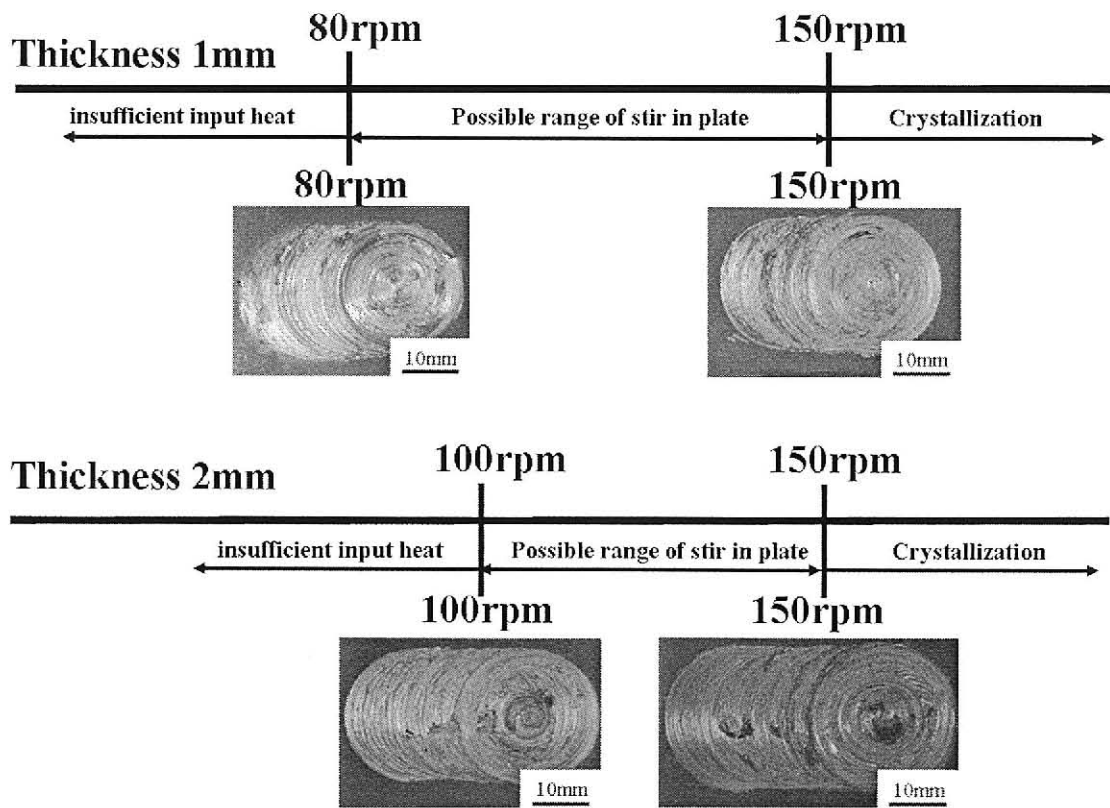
Possible welding range and surface appearance for 1 mm and 2mm thick $Zr_{55}Cu_{30}Al_{10}Ni_5$ Bulk metallic glass.
